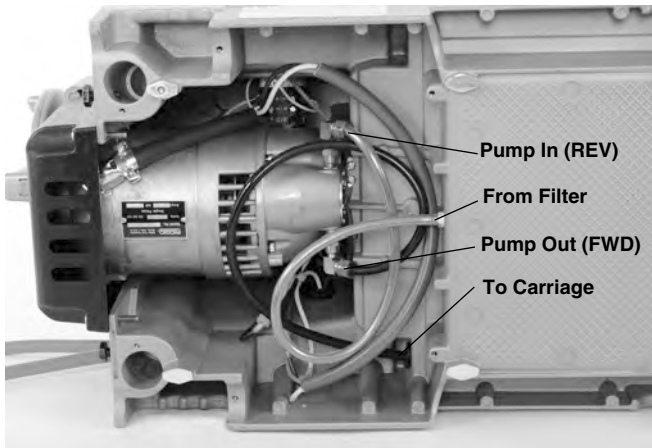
A – Oil Pump Connections for Left Hand Threading (Switch in REV)
